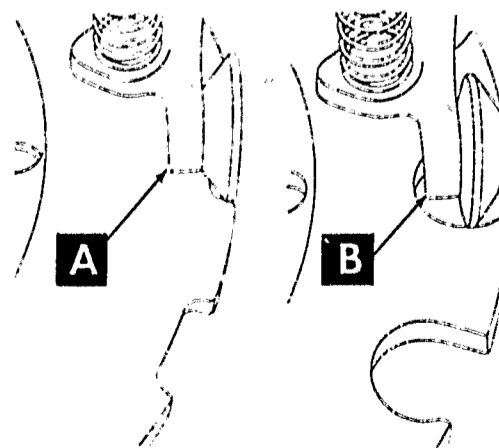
The roller knock-out pawl may be assembled with the roller rim either toward the edge as in A, or toward the center as in B. Set the roller as in B for deep-cell plates.
